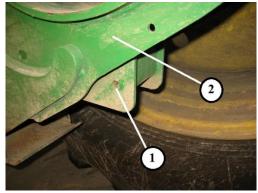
Jack Stand Bracket Key 1 – $\frac{1}{2}$ " Hole (to be drilled to 7/8") Key 2 – Windrower Main Frame
